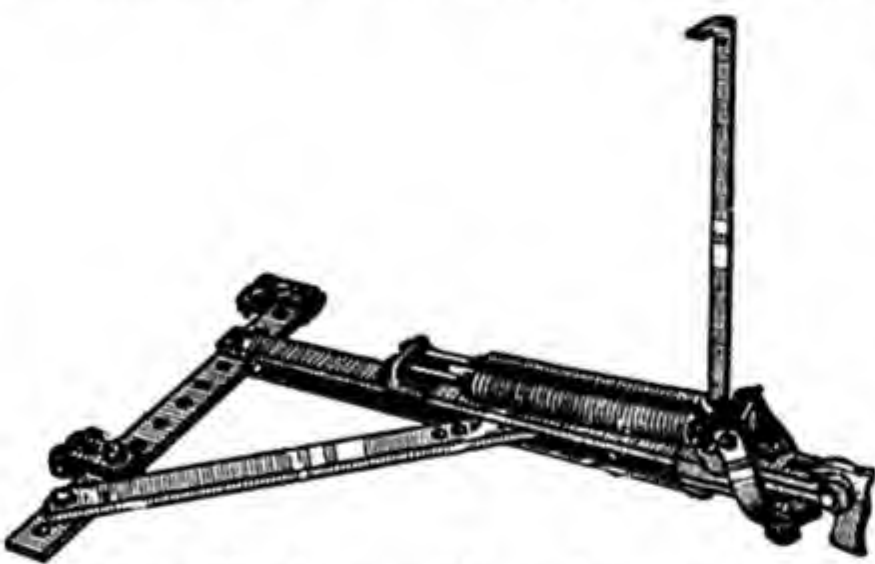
Hitch assembly and spring release for moldboard plows.
